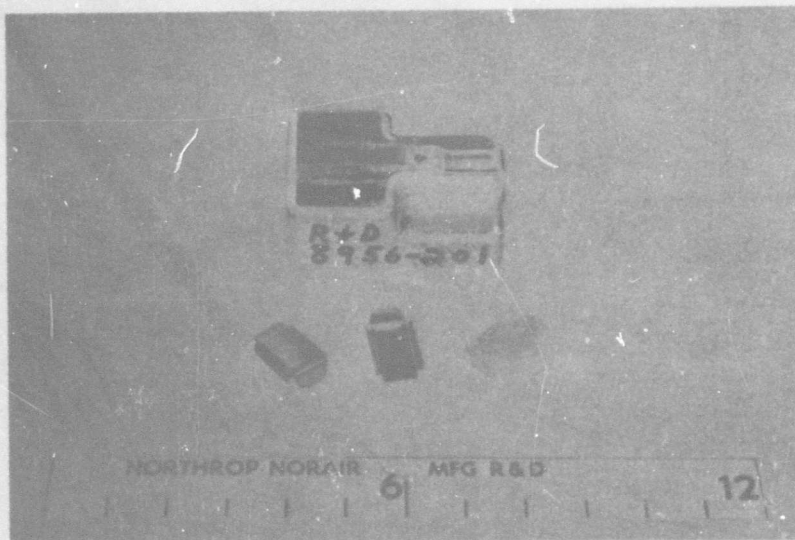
HEAT SHIELD PANEL ATTACH CLIPS FABRICATED FROM .040" T111 SHEET WITH FORM BLOCK
